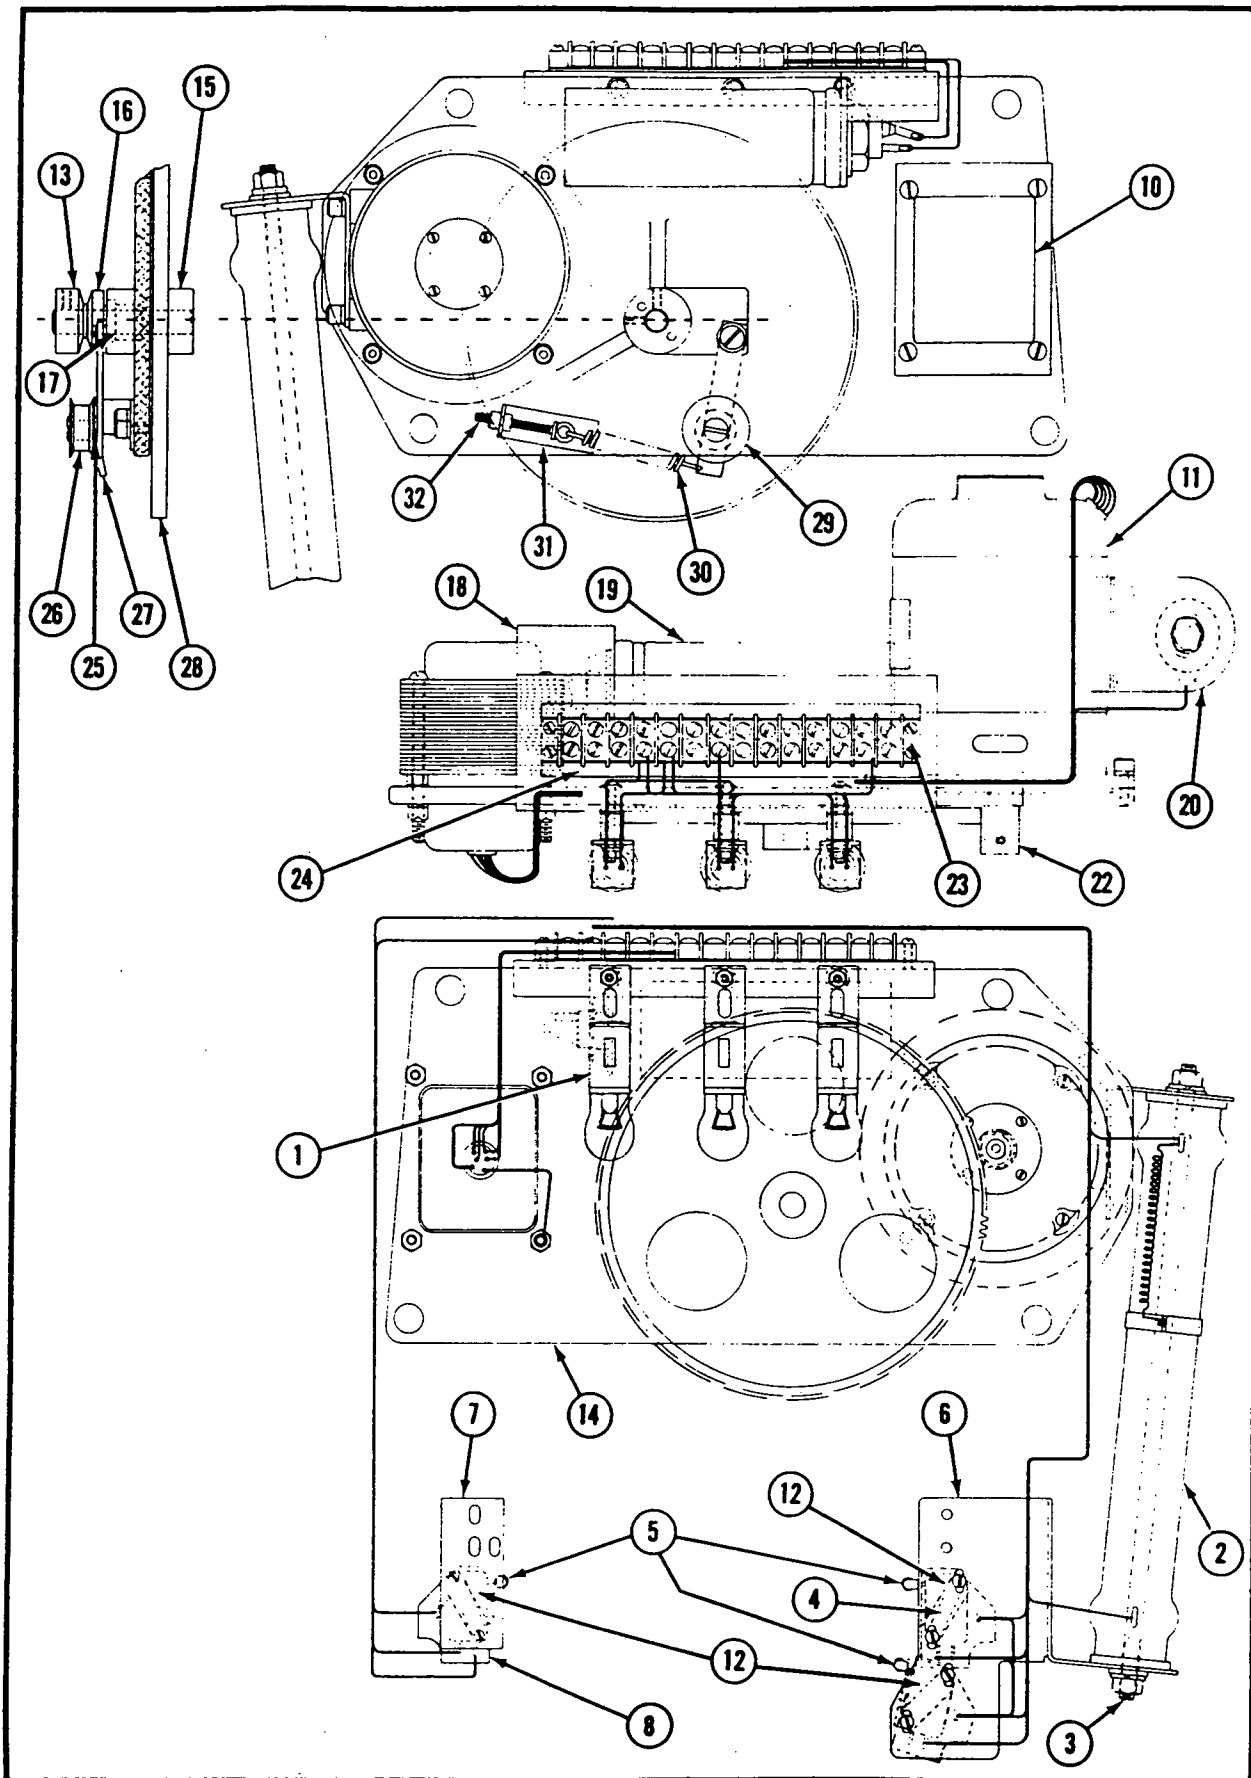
SHUTTER DRIVE MOTOR ASSEMBLY
